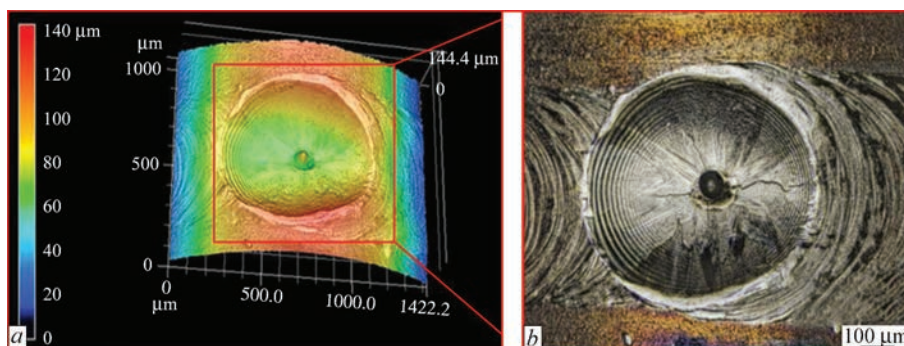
Crater with cracks at the end of a welded joint during laser welding: 3D scan of the crater (a), top view of the crater (b) [20]
